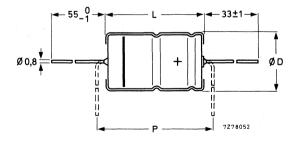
Case sizes 00, 01, 02 and 03. For dimensions D, L and P, see Table 1.
